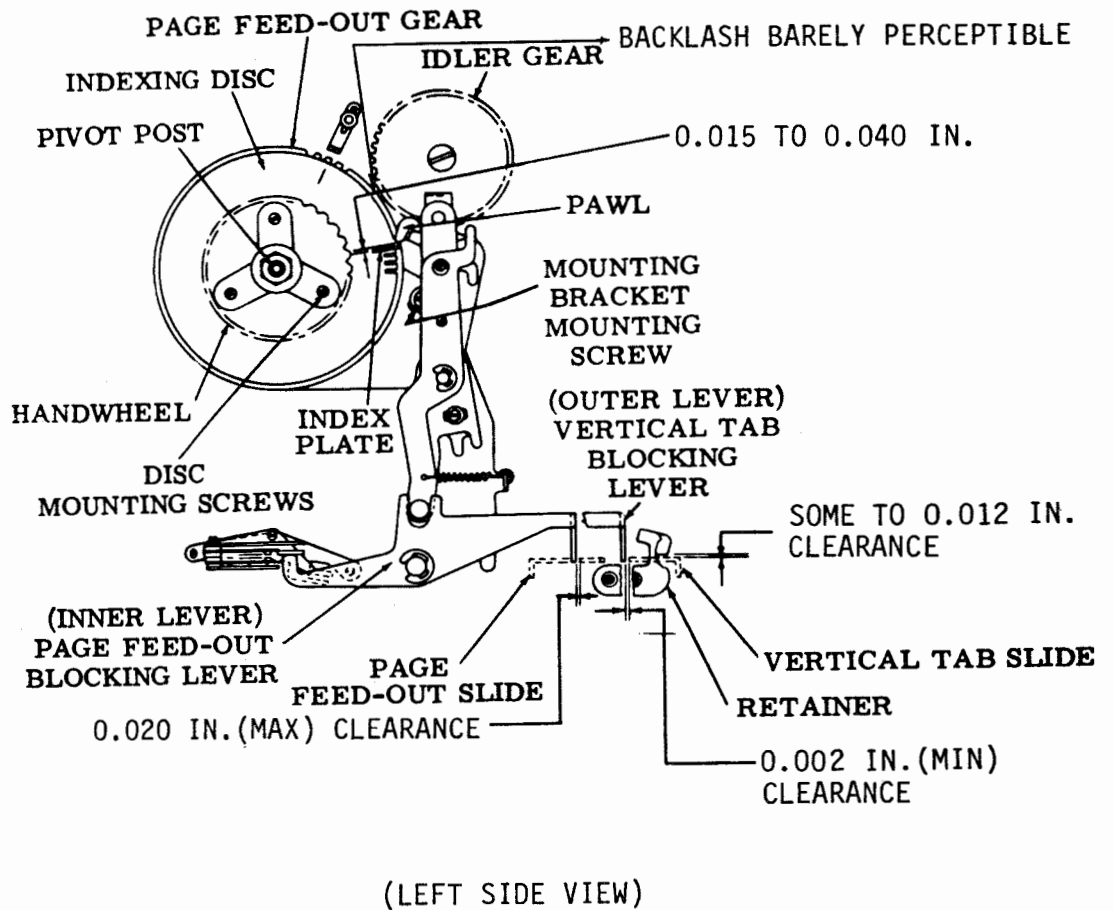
Page Feed-Out Gear Play, Mounting Bracket, Indexing Disc, Page Feed-Out Index Plate Position, and Vertical Tabulator Slide Retainer
